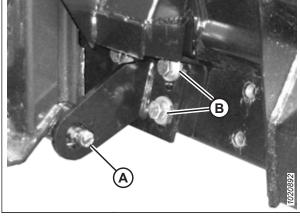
Feeder House Locking Pin used on John Deere 60, 70, S, or T Series – X9 Series is Similar
